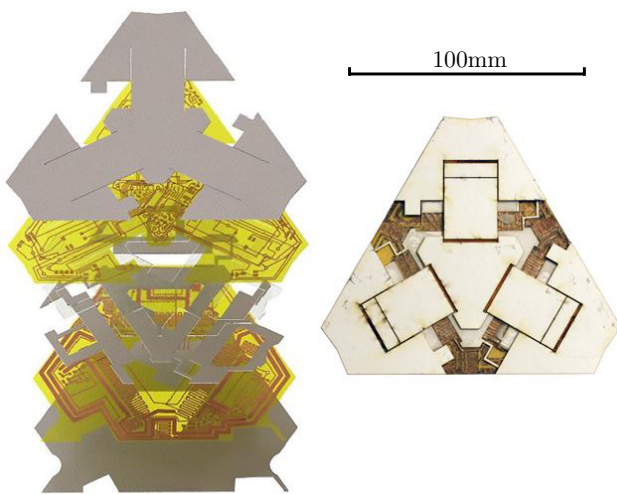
(Left) Exploded CAD view of the layers comprising one self-folding robot unit. (Right) Photograph of an assembled robot in its unfolded configuration as viewed from below.
